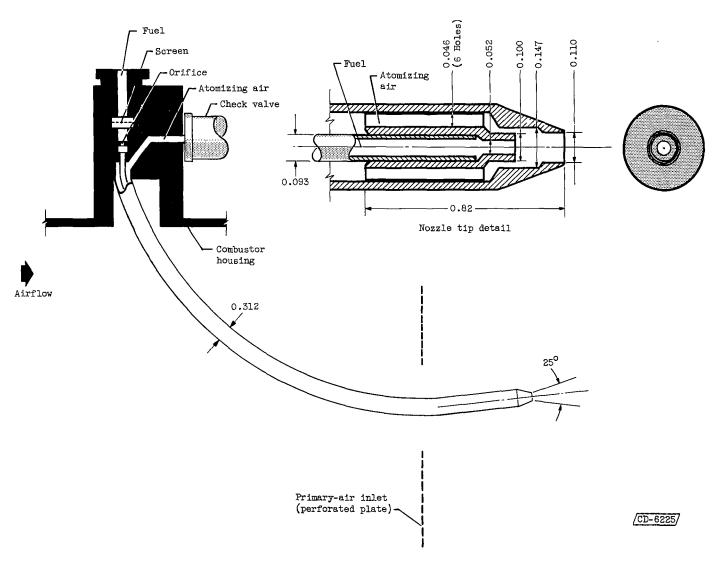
Test fuel injector 7. (All dimensions in inches.)
